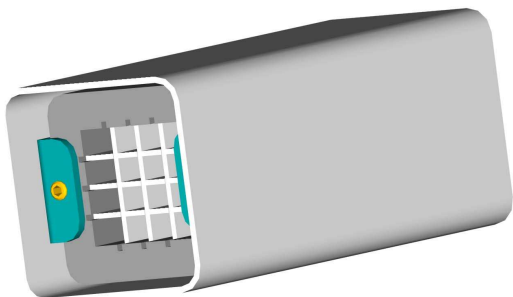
Isometric view of front of the H8711 PMT assembly. The Mu shield and 4×4 alignment grid are visible.
